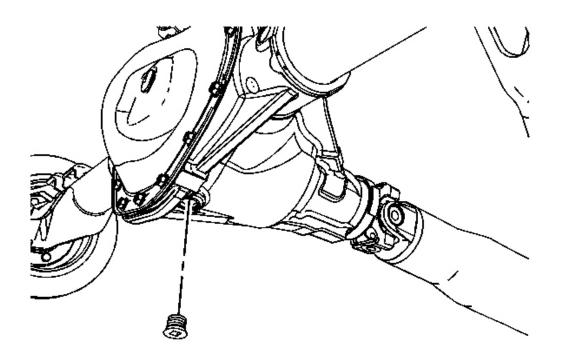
View Of Drain Plug Courtesy of GENERAL MOTORS CORP.
